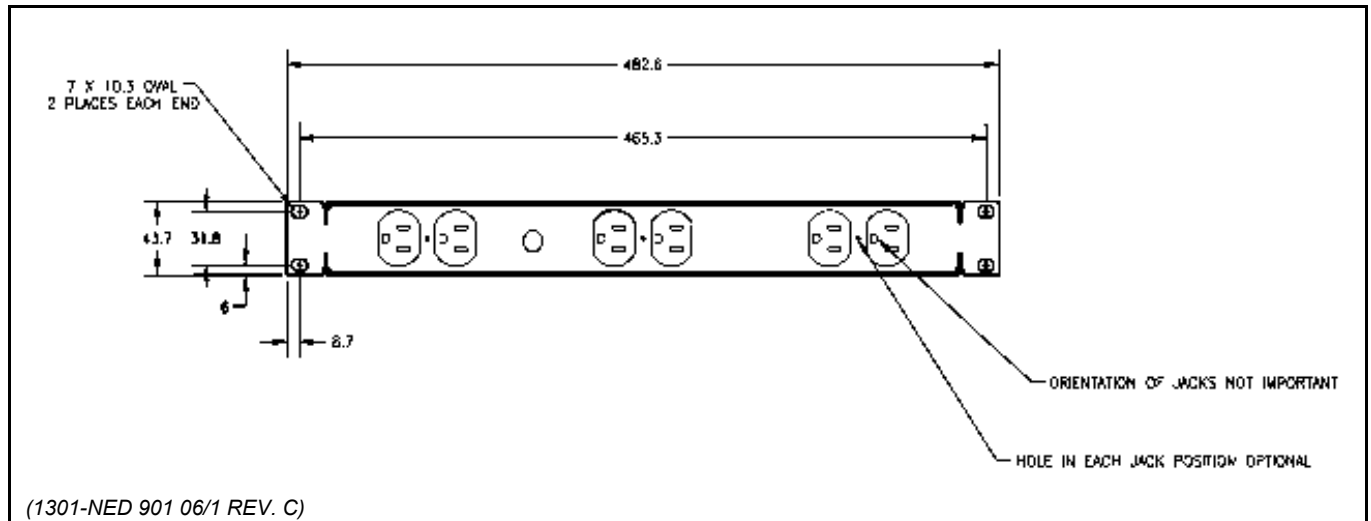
Assembly Diagram of AC Outlet Strip NED 901 06/1
